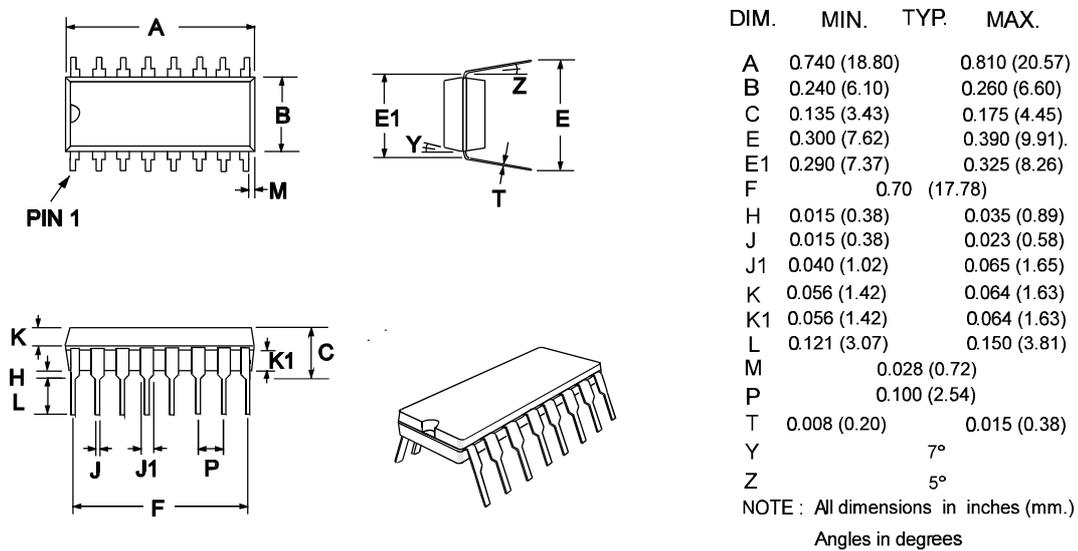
DIL Mechanical Outline: Order as part no. FX105AP3
